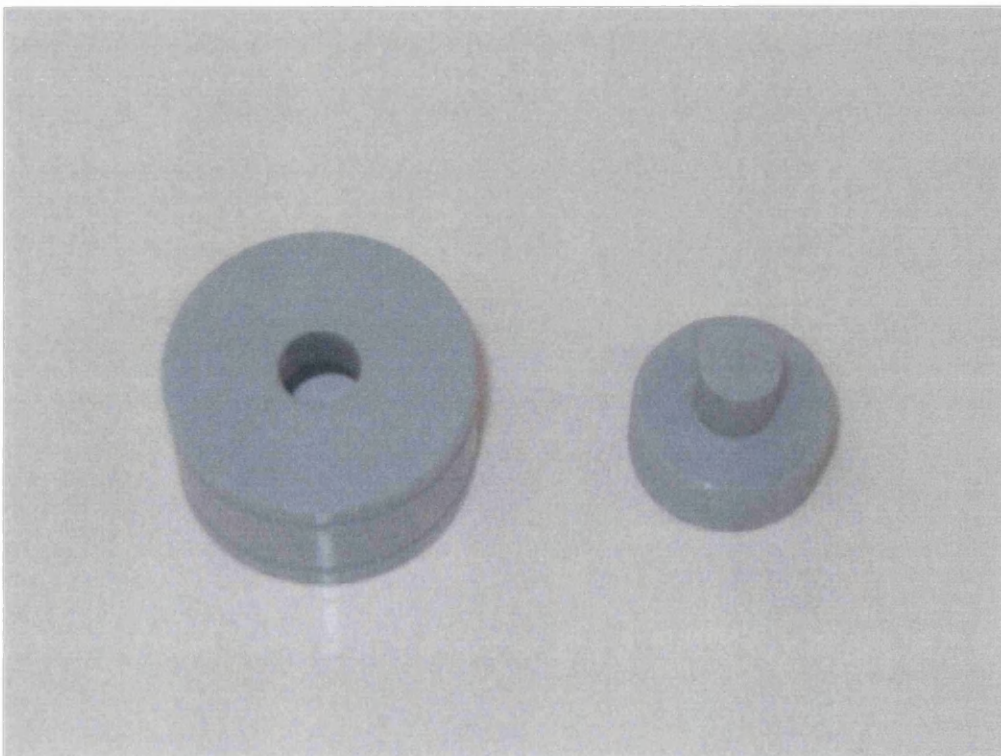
Modified Upper Platen and Plug (Underside View)
